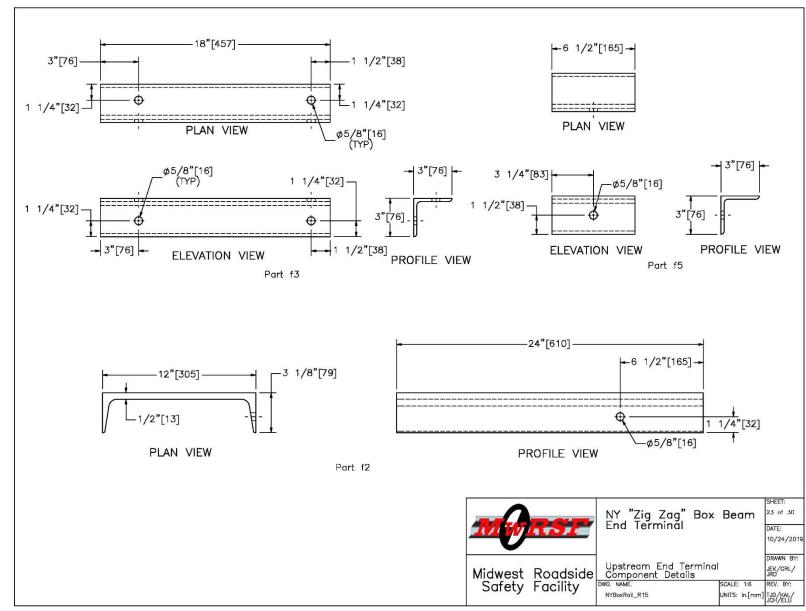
Upstream End Terminal Component Details, Test No. NYT-1
